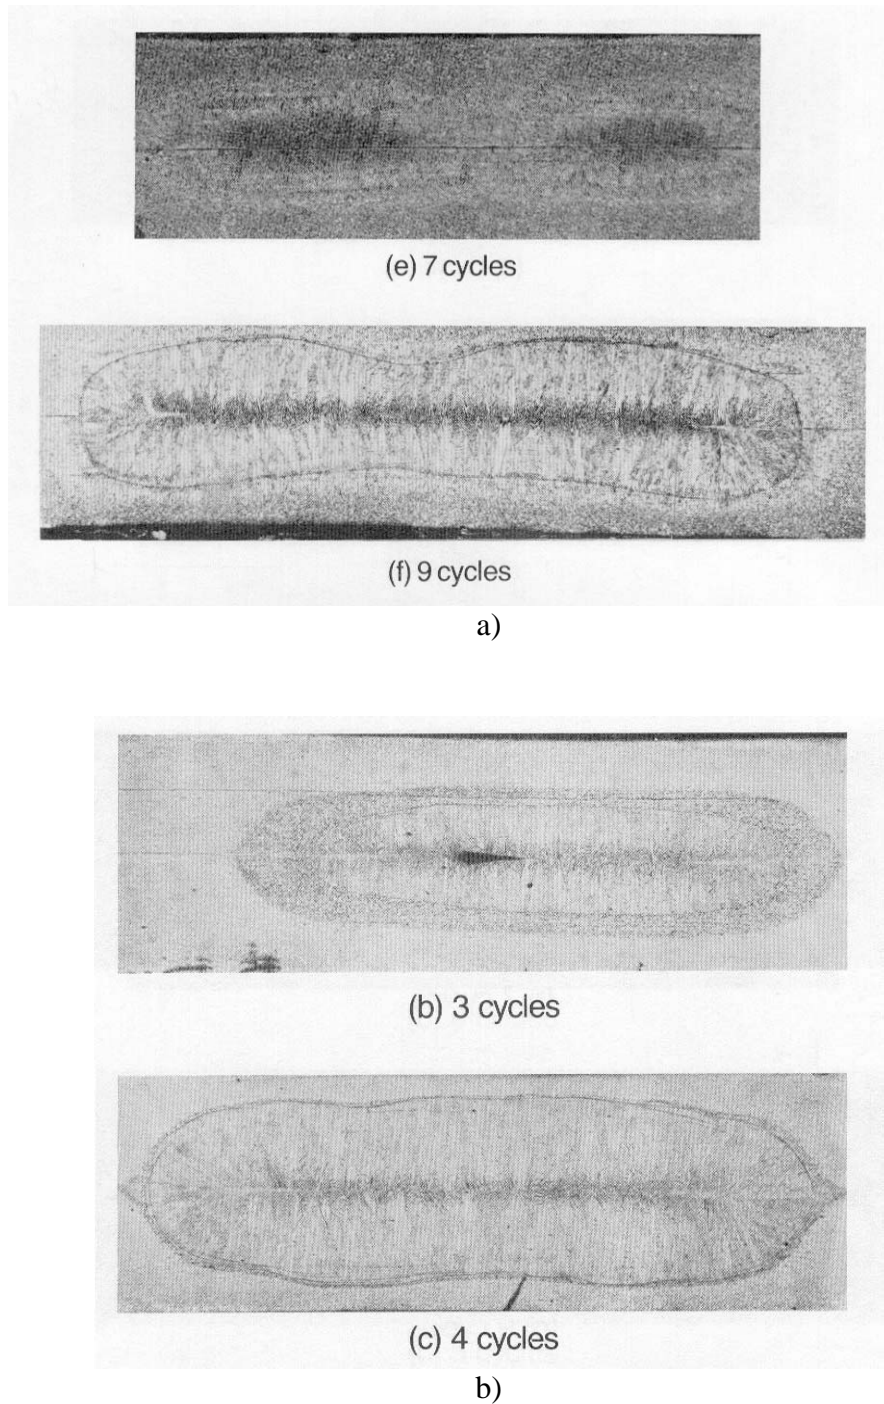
Cross sections of welds in a) HDG steel showing the annular molten zone at increasing weld times, b) uncoated steel showing the central molten zone progression at increasing weld times. [23]
